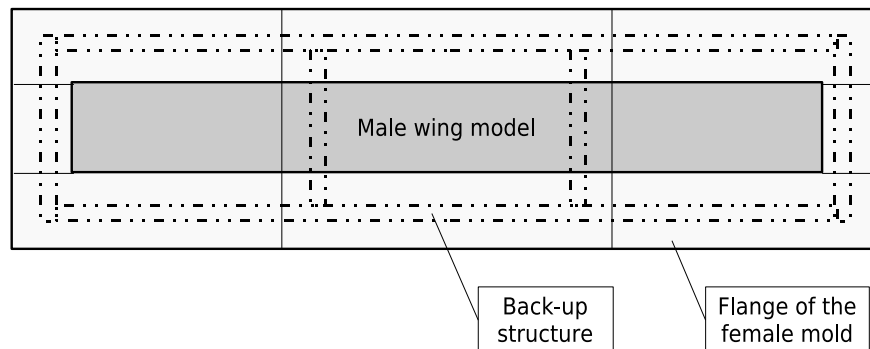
Schematic top view of the mold assembly showing the flange of the female mold and the male wing.
